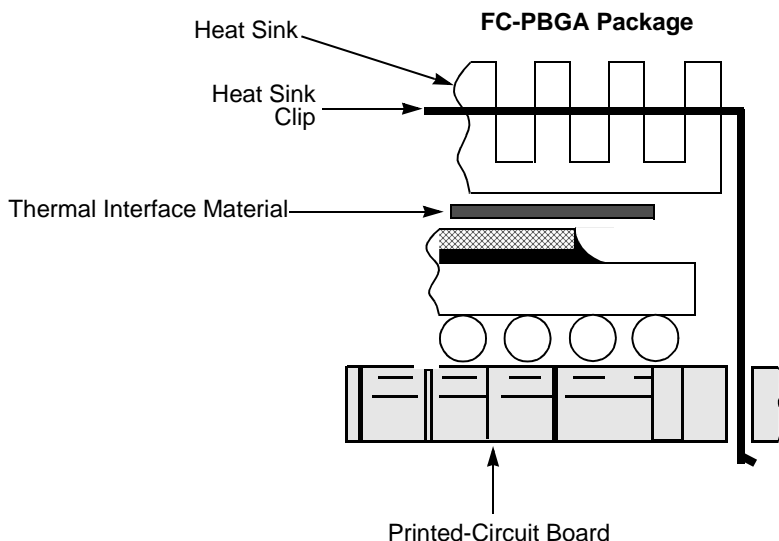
Package Exploded Cross-Sectional View with Several Heat Sink Options
